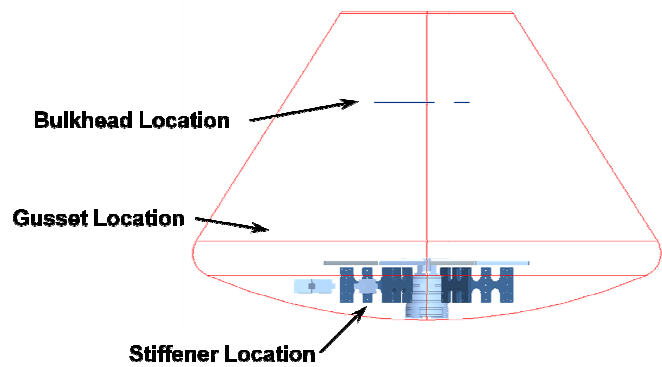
Examples of installed ballast blocks inside the PA-1 CM FTA
